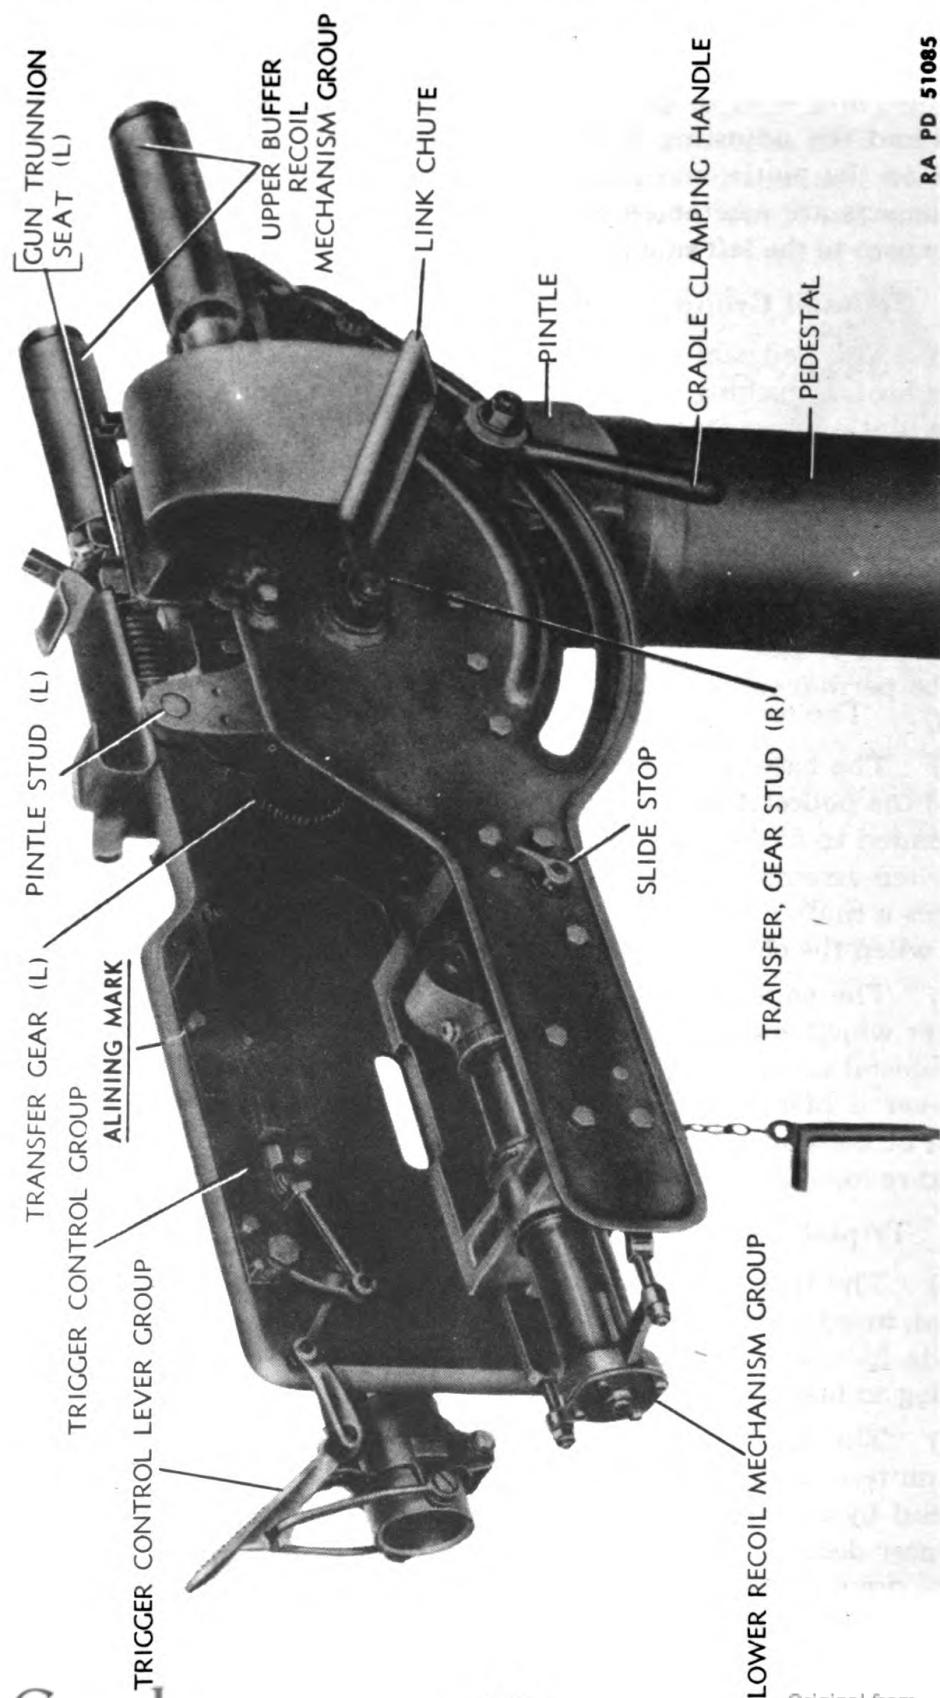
Cradle Mounted on Pedestal — Right Side View — A.A. Machine Gun Mount, Cal. .50, M2A1
